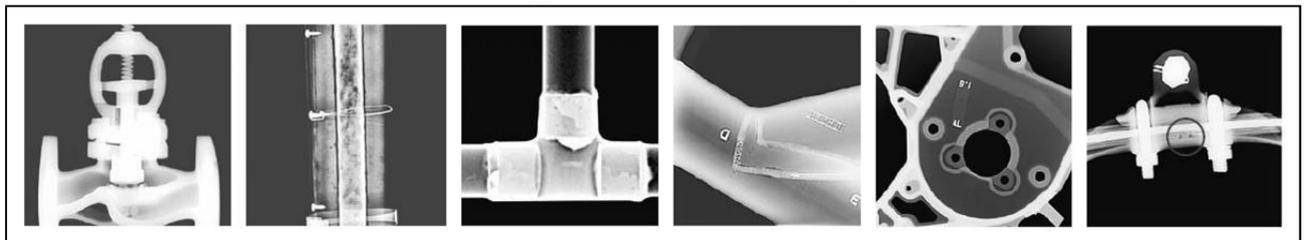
Several applications of radiographic testing in industry; from left to right: valve inspection, corrosion detection under insulation, cooper pipe brazing identification, weld inspection, casting inspection, examination of electrical cable clamp [WS107]
